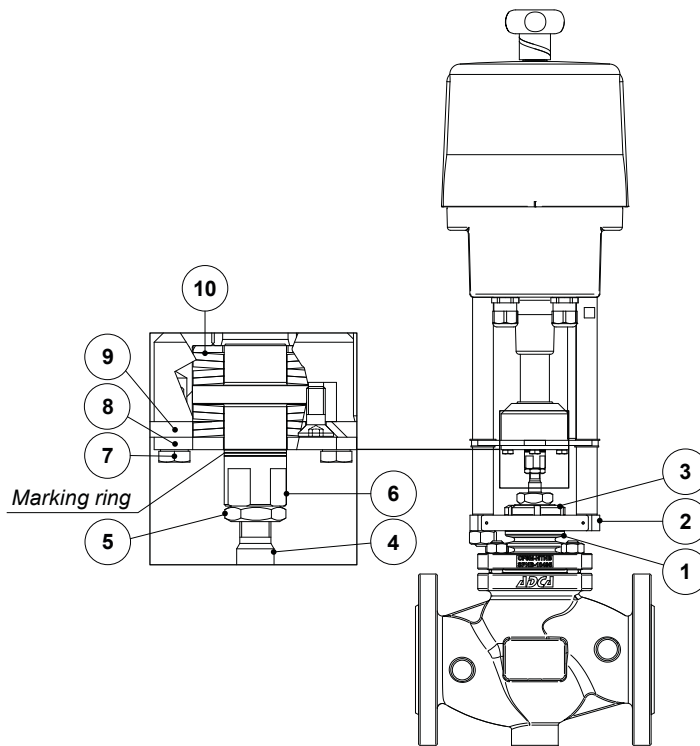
Mounting the actuator onto the valve (ELS20 to ELS140)
